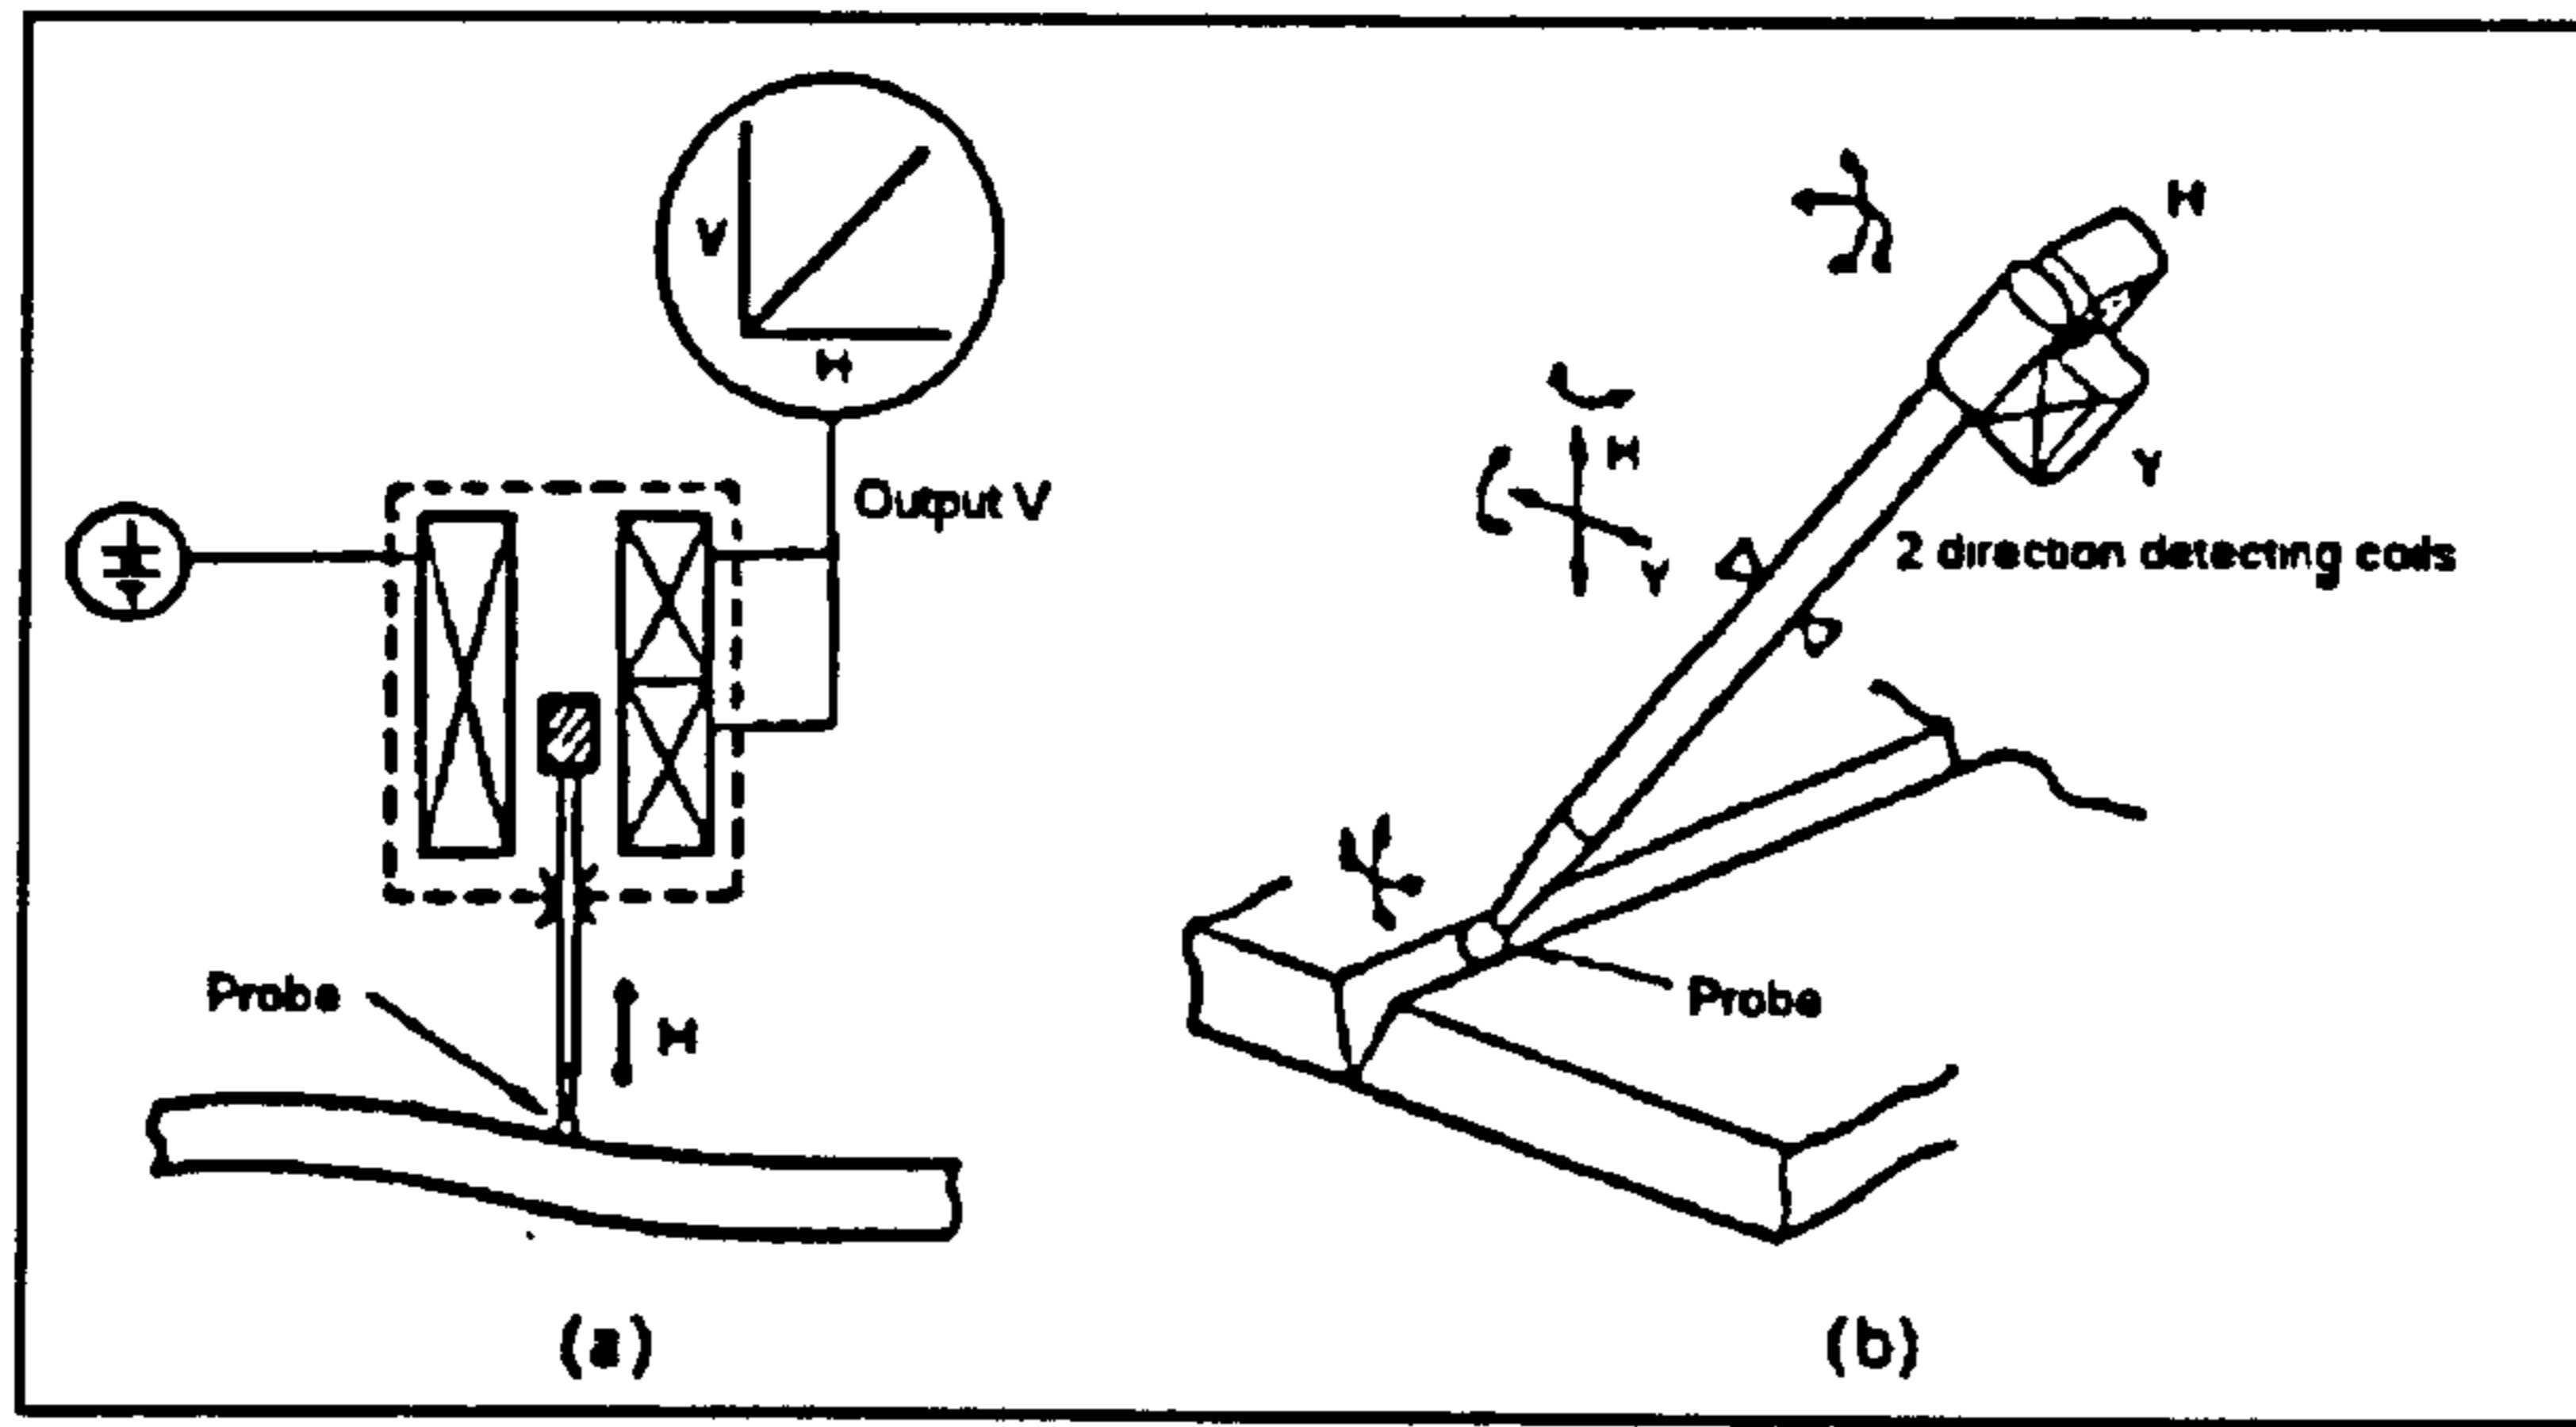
Weld joint mislocation [ref. 108]
